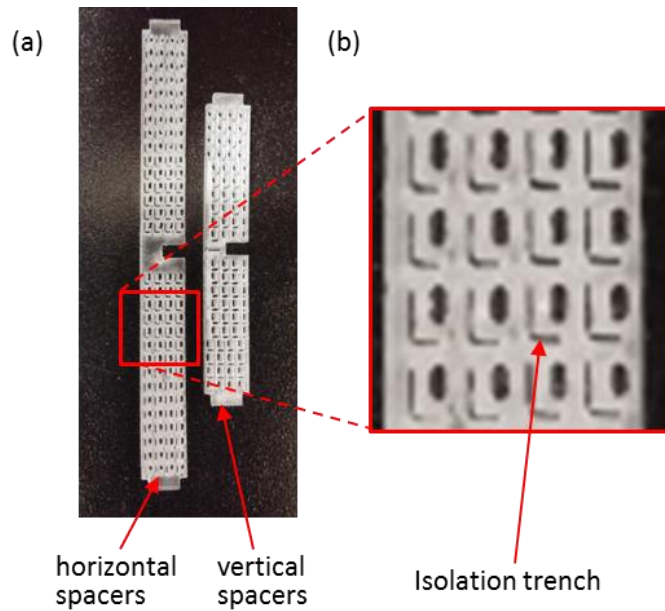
Fiber spacer structures. (a) Horizontal and vertical spacers fabricated using laser micromachining; and (b) Zoom-in view of the horizontal spacer showing the elliptical threading holes and “L” shaped isolation trenches [83]. Reprinted with permission © 2014 by JBO.
